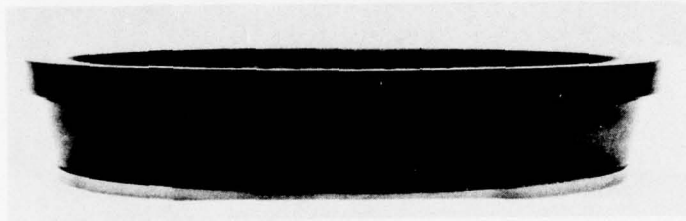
and 21 are photographs showing the damaged bearing components of the Z-type cage and S-type cage oil starvation tests, respectively. The silver plating of both cages separated from the steel, indicating very high temperatures.
